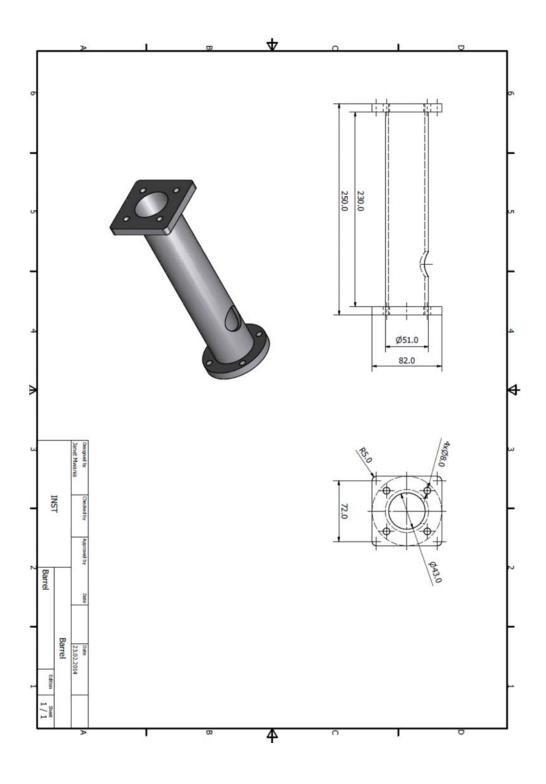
The 3D image of the Barrel with End and Front elevations showing dimensions
